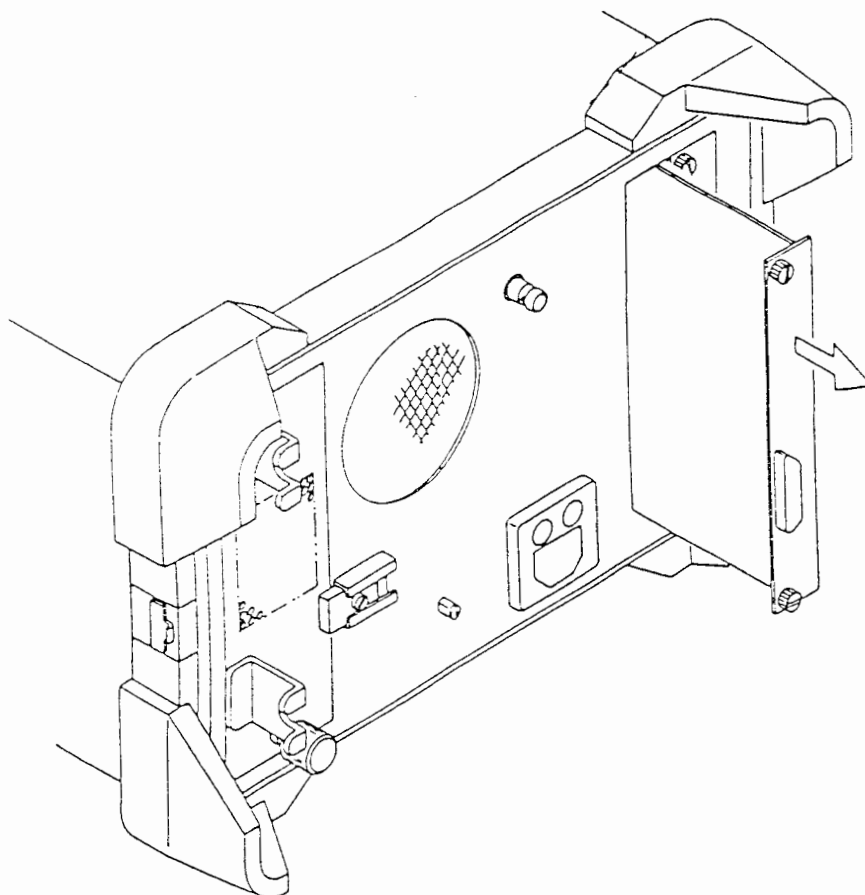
Inserting and Removing GP-IB Interface Board
